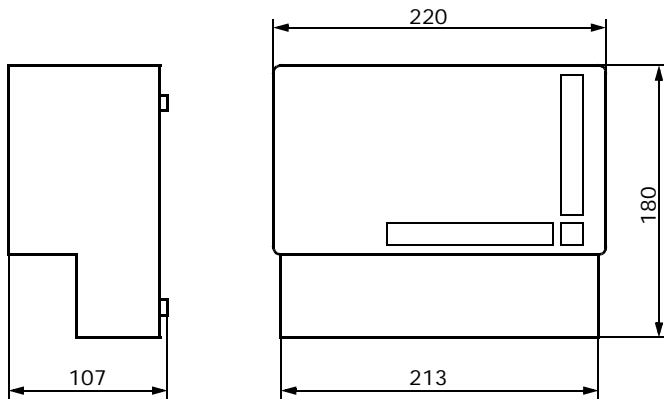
Dimensions of control unit 2N, 2N/ET, 4N and 4N/ET
